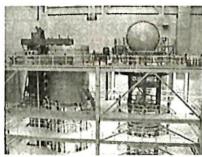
Take-over test of the FSW plant supplied by ESAB AB, Welding Automation to Boeing's space rocket plant
